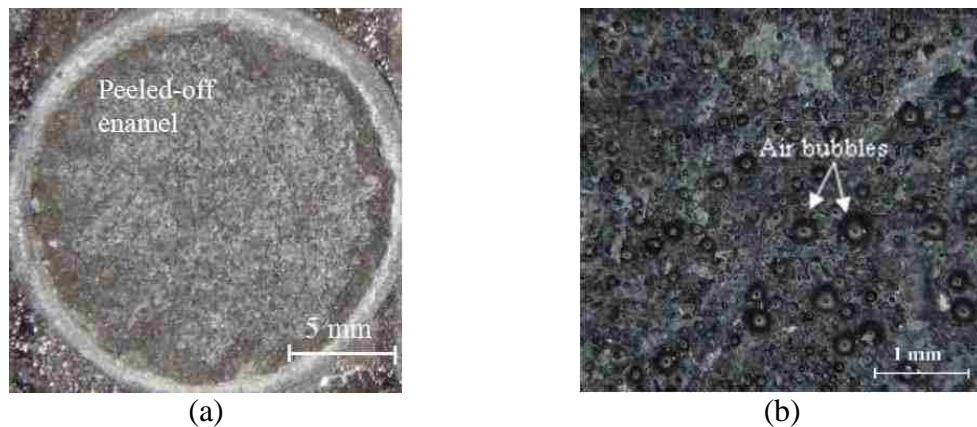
Fracture surface of enamel coating (a) on a steel plate after a pull-off test; (b) of a magnified area [17].
